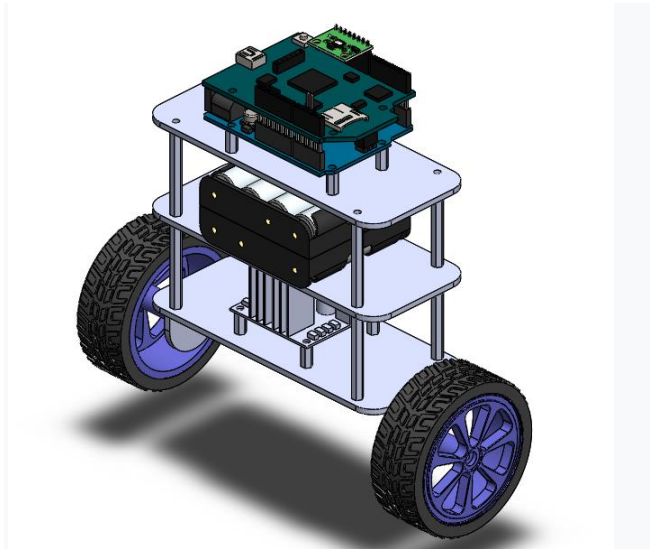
General view of two-wheeled mobile robot 3D Model.
